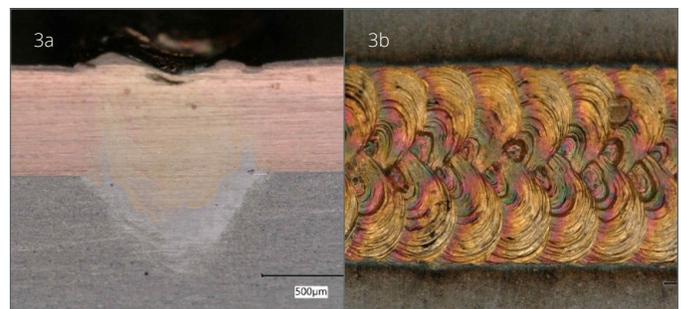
Cross section of nickel-coated copper battery tab welded to 1000 series aluminum busbar (Figure 3a). Top view (Figure 3b).
